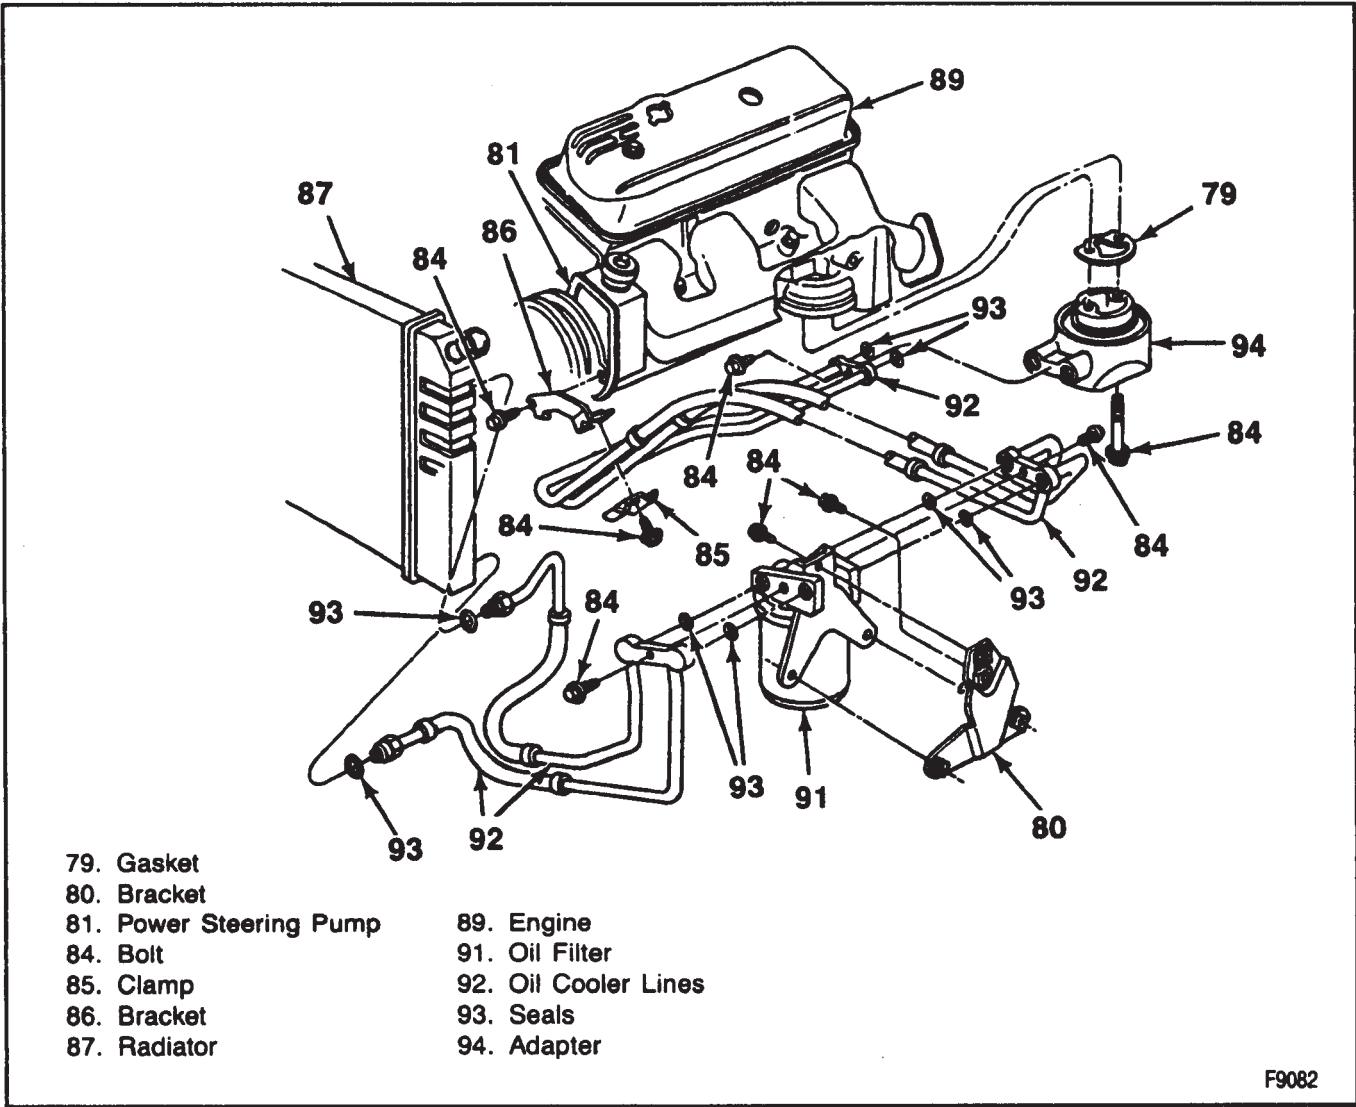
Engine Oil Cooler Lines (Two-Wheel Drive)
